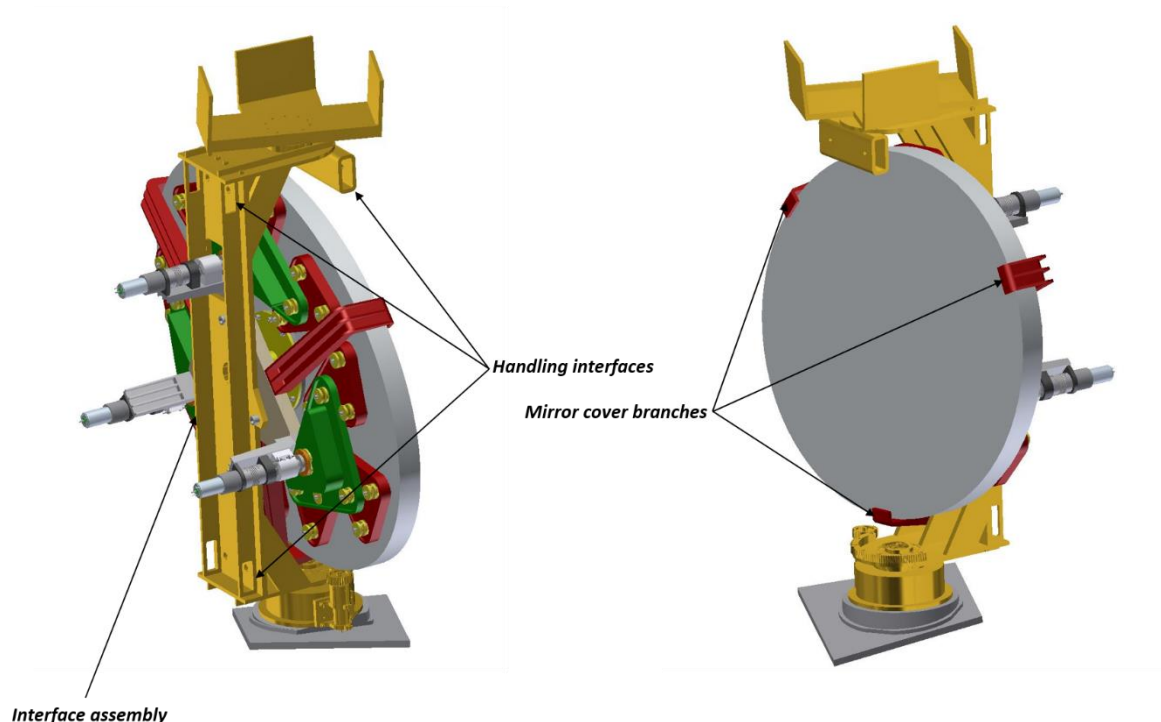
M11 assembly that will be inserted/extracted from the MAORY main structure.
